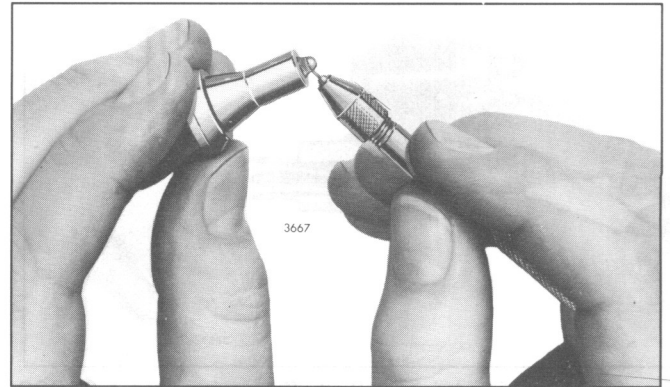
Cleaning Spray Tip Orifices with Tool J 4298-1
